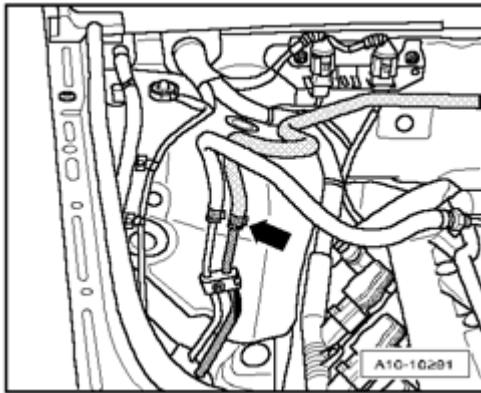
Disconnecting Vacuum Hose To EVAP Canister
